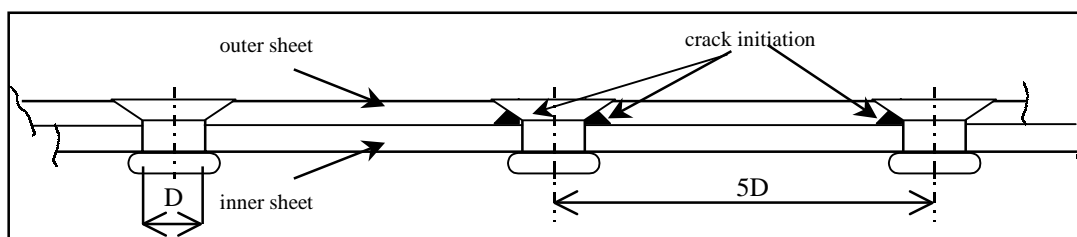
Multiple site damage in a riveted joint
